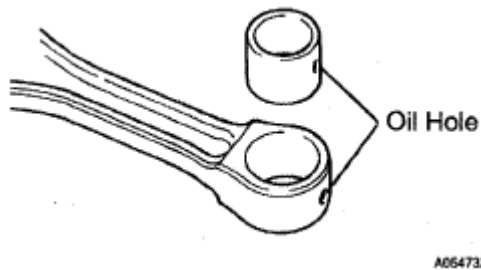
Aligning Oil Holes Of Bush And Connecting Rod
